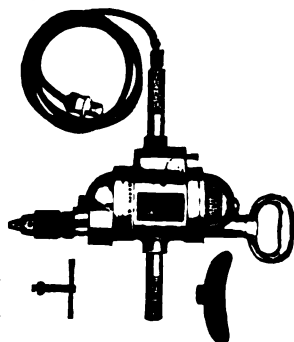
Type AU and BU 3/16" and 1/4" Universal Motor Drill
